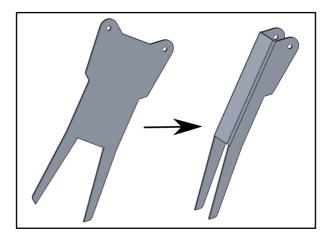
Sheet metal laser cut and bent Source: Exero [7]
